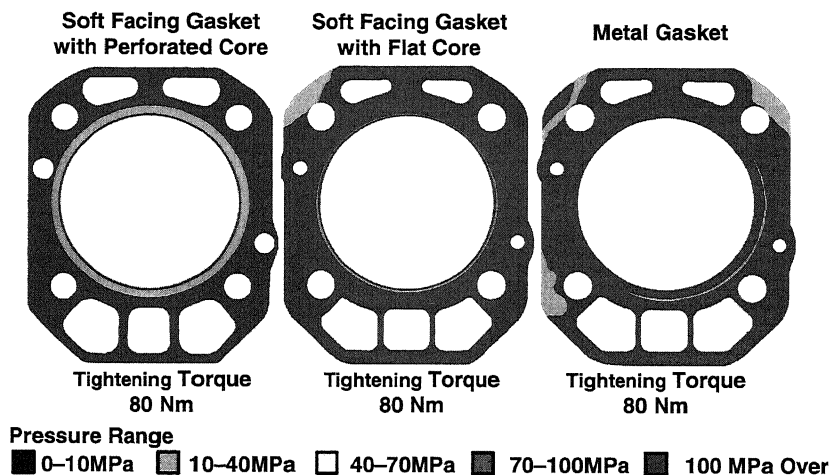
Surface Pressure of Test Cylinder Head Gasket
